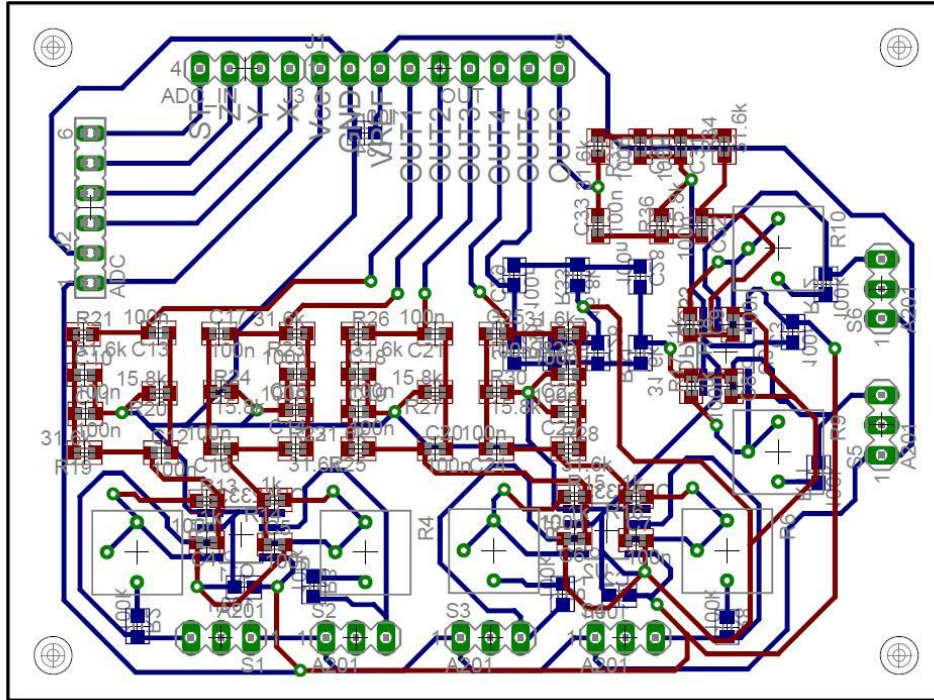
Pressure Sensor and Accelerometer PCB Layout
